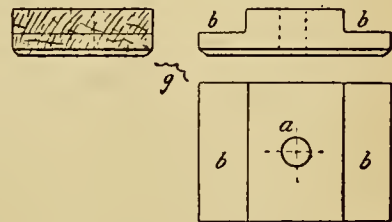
PLATE FOR THE SECURING BOLT OF BRACKET. One in Number.
